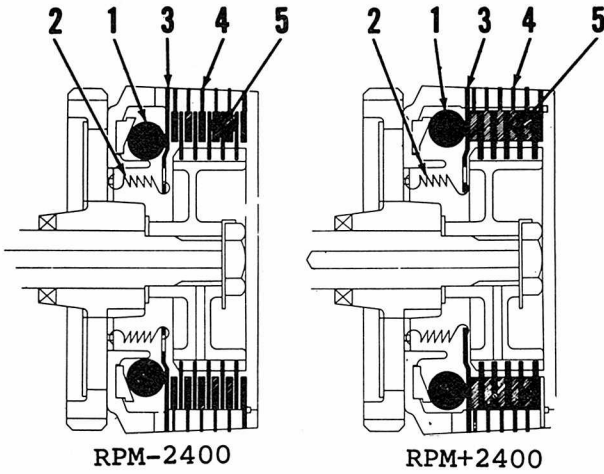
Cross sectional view of automatic clutch used on F 50 and F 50R models.
